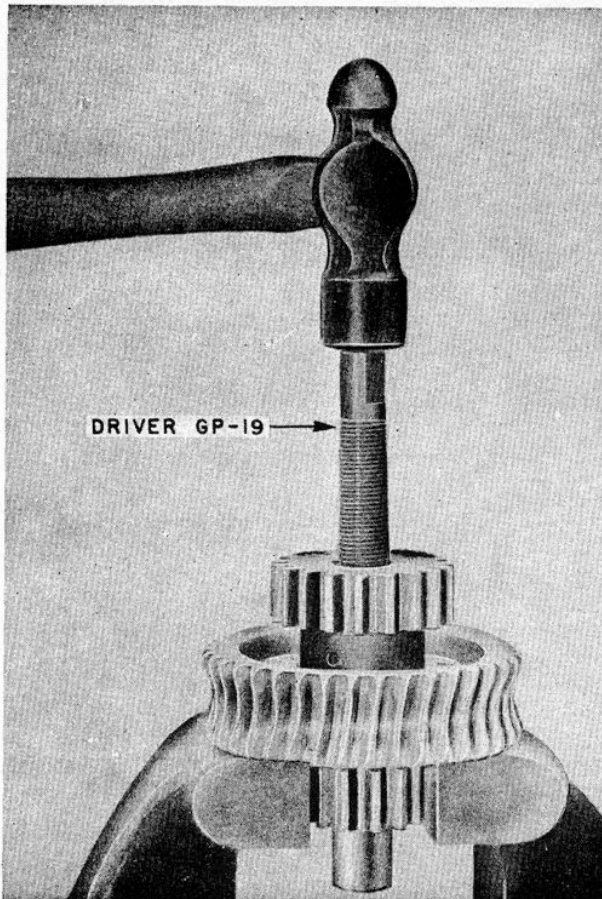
DRIVING BUSHING FROM PINION GEAR
